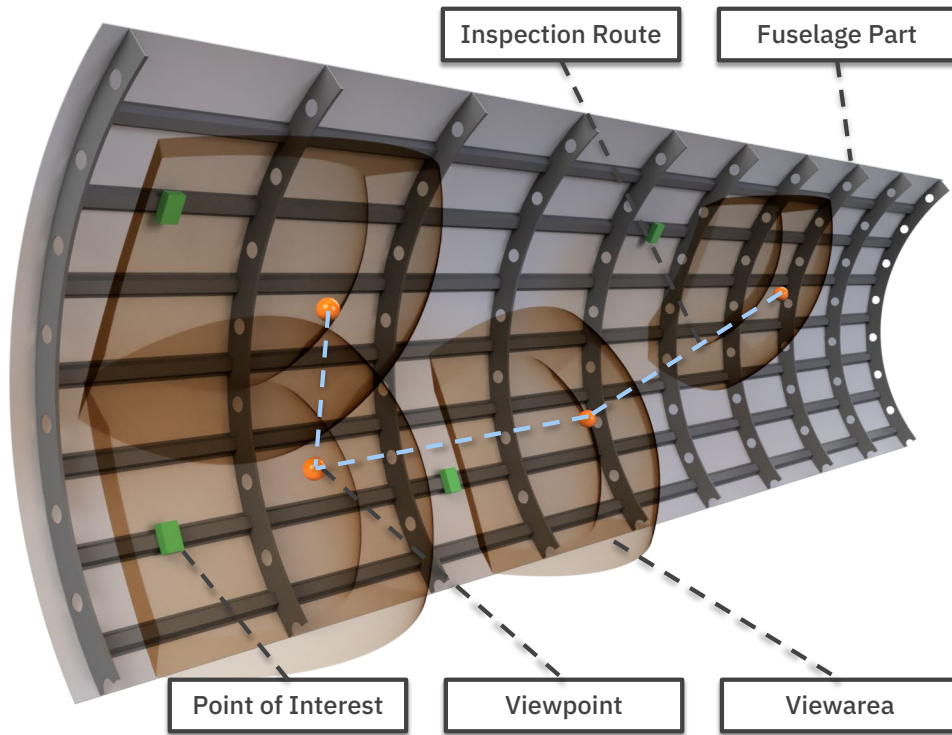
Overview of the terminology used throughout this work. Viewareas specifying areas from which Points of Interest can be inspected. Viewpoints as discrete points inside the Viewarea and a path connecting multiple Viewpoints.
